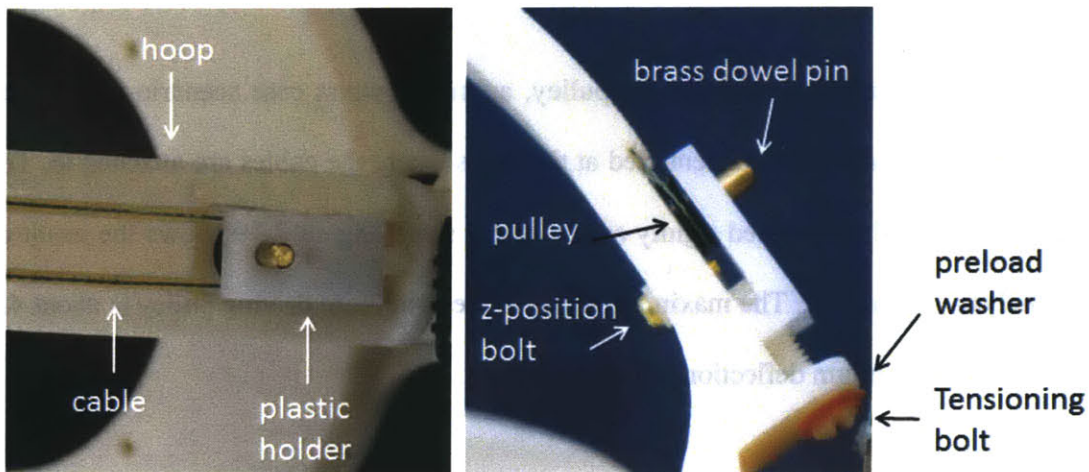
The cable tensioning mechanism uses a bolt to finely control movement of the tensioning pulley, which is held in a plastic holder with a dowel pin. Left: Top view of the mechanism. Right: Side view of the mechanism.
